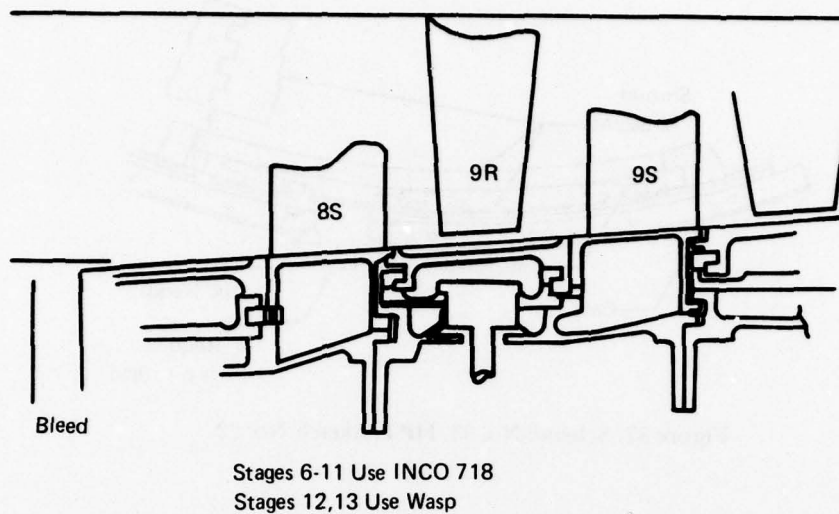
Scheme No. 33, Compressor Stages 6 through 13, Sketch No. 20.
